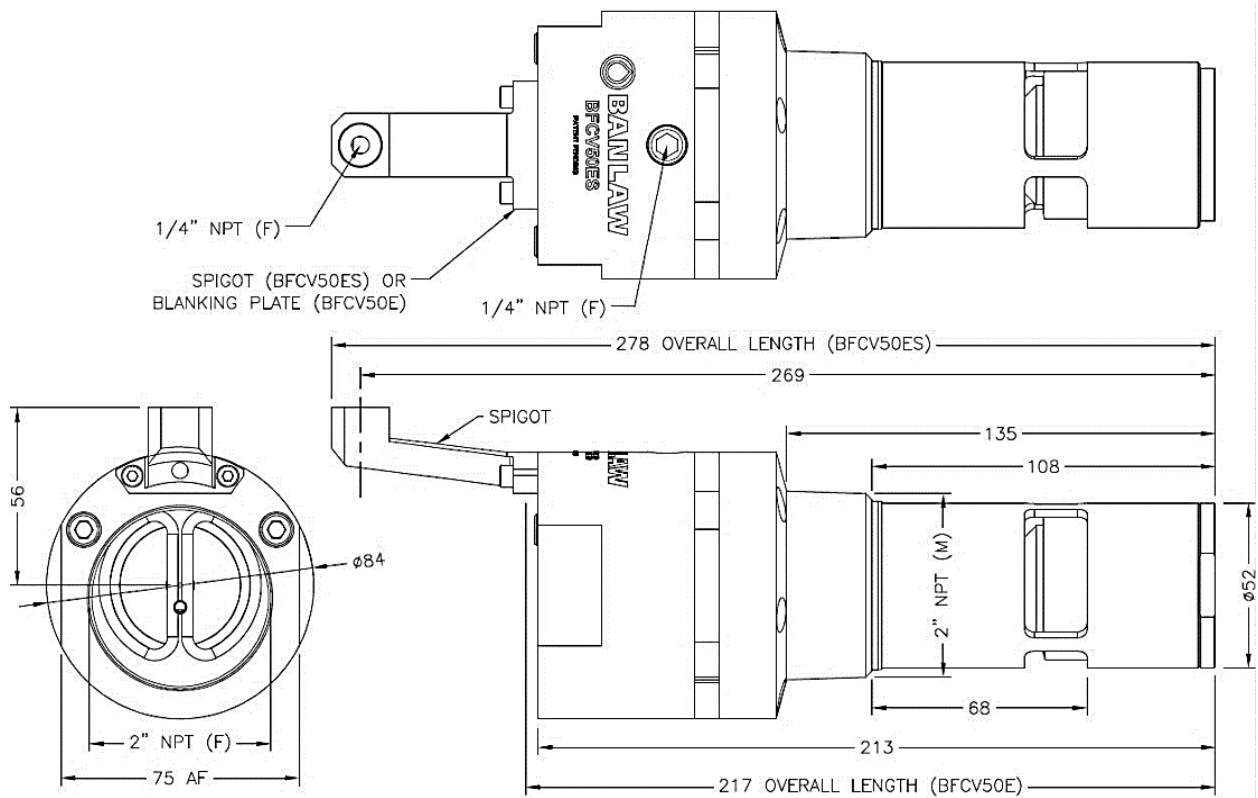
Overall Dimensions of BFCV50E and BFCV50ES Valves
